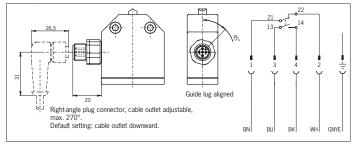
Dimension drawing/connection diagram for SN01.558SVM5 with plug connector M12 (SVM5, 5-pin)
